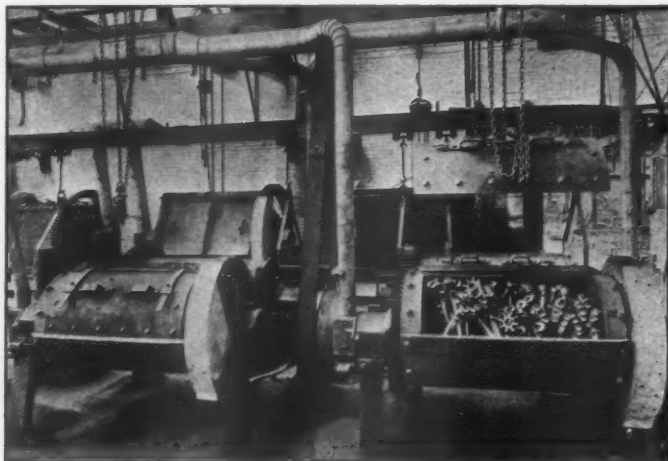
A TYPICAL TUMBLING MILL INSTALLATION IN A MODERN STOVE FOUNDRY. THE COVERS OF THE MILLS ARE HANDLED BY TRIPLEX HOISTS
